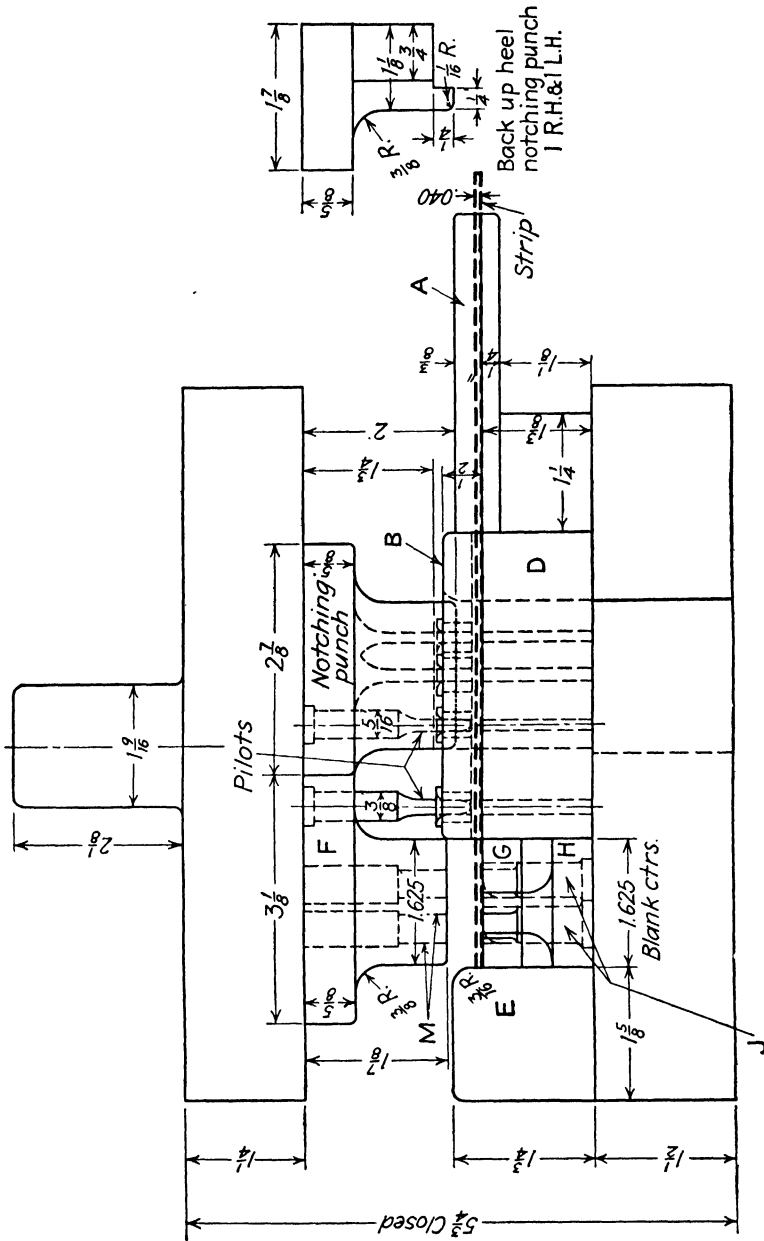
Front elevation of the progressive die that completes the part shown in Fig. 52 in one press stroke. This is a mass-production job.
